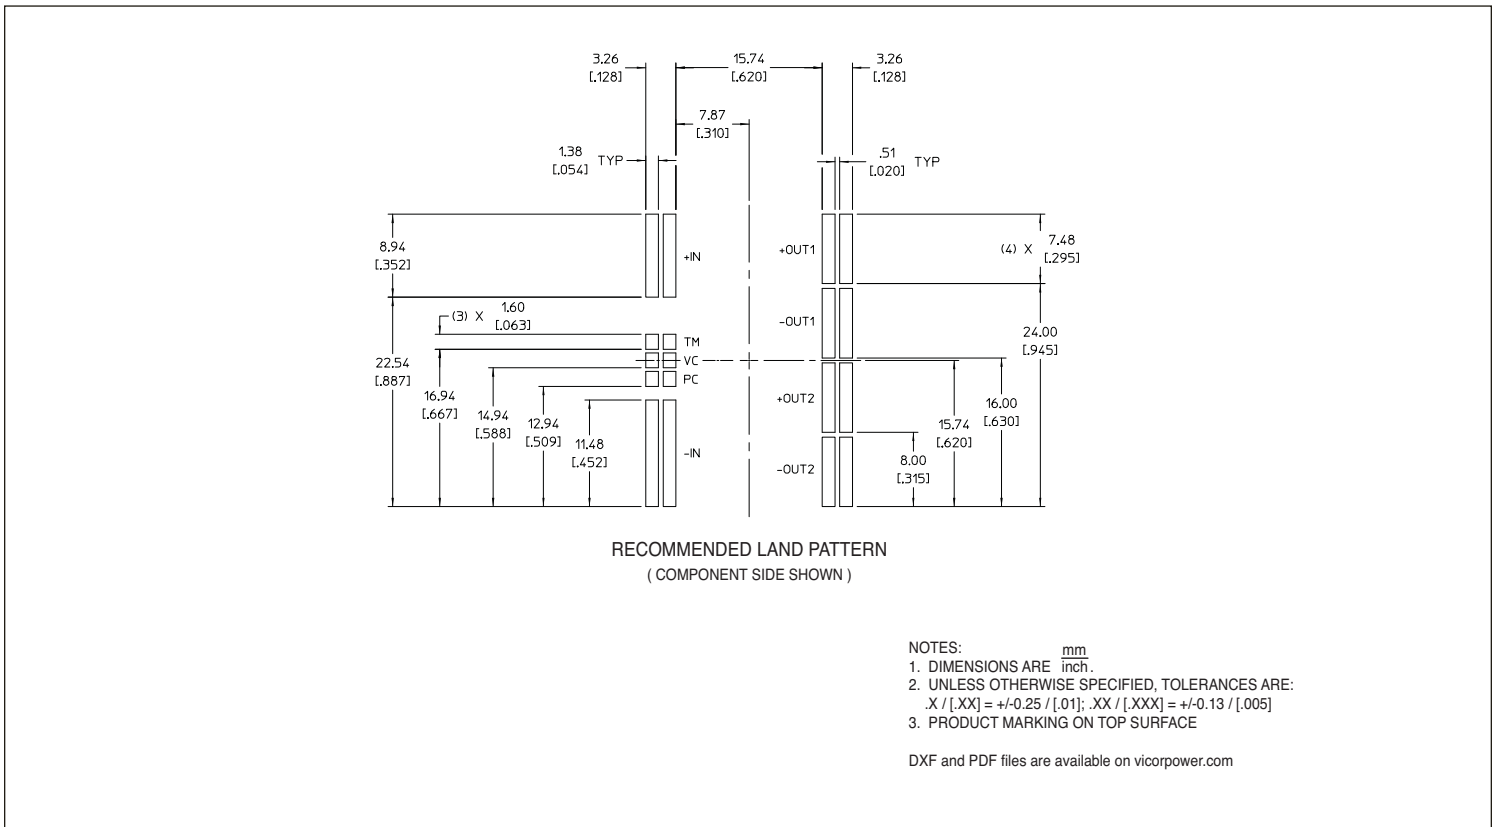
VTM J-Lead PCB land layout information; Onboard mounting
